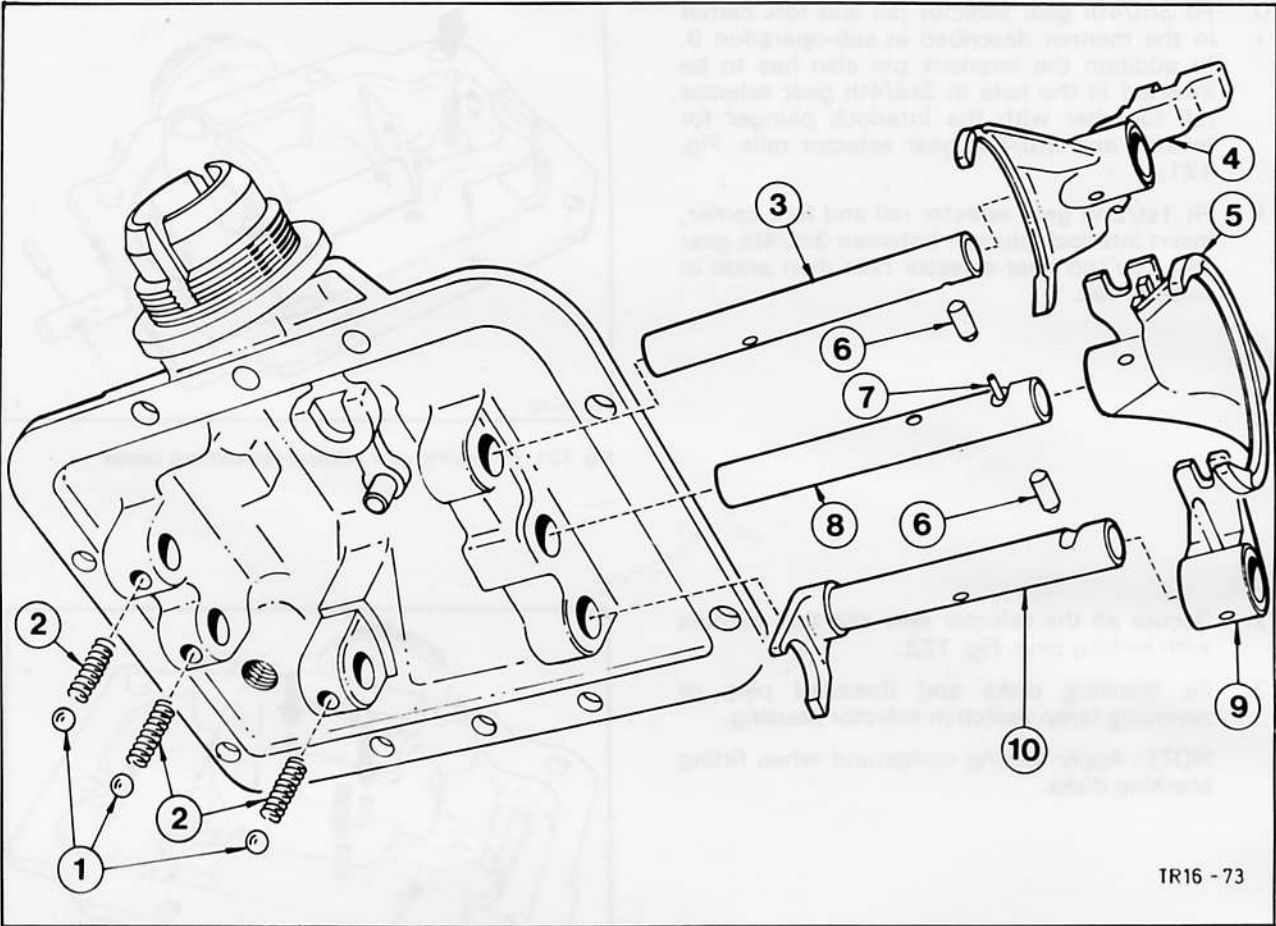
Insert spring and ball of 1st/2nd gear selector rail
